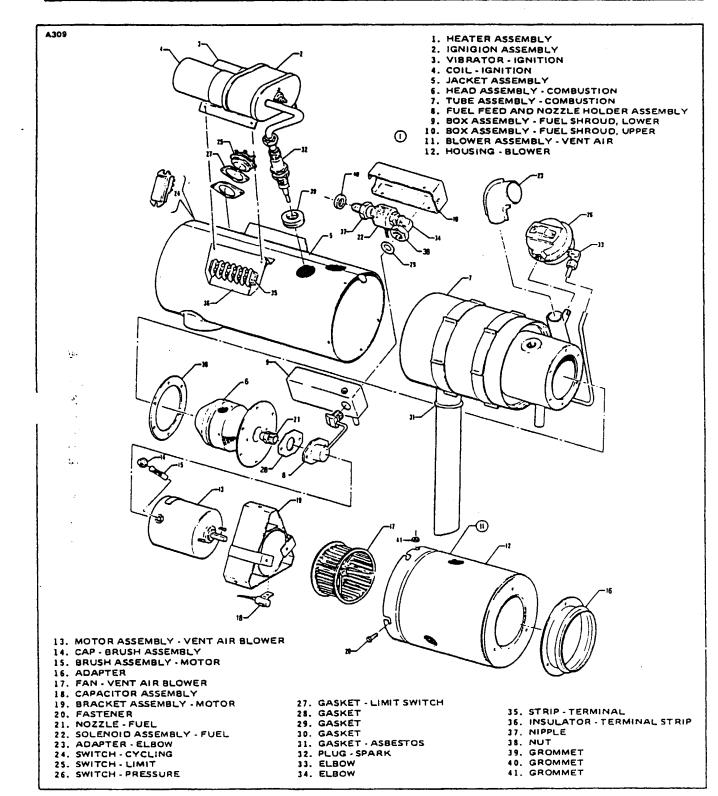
Exploded View of Heater Assembly (30,000 BTU)
